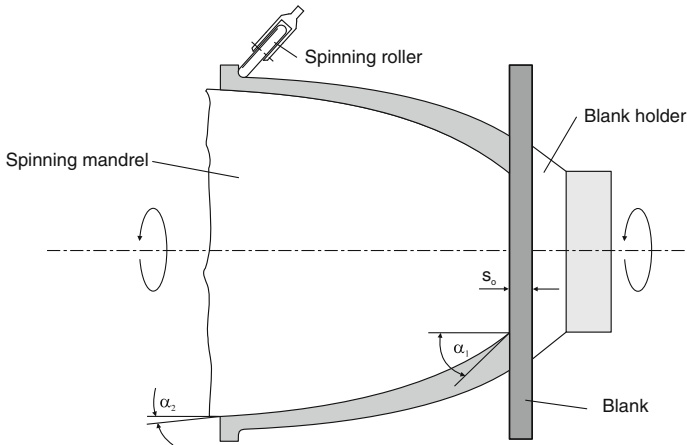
Projection lengthening of a workpiece with a *convex* surface line
